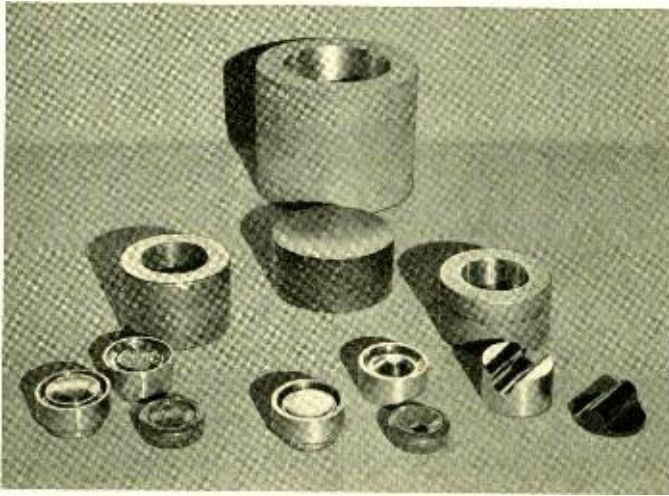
A mold with step-like pistons is used where a large number of test pieces of the type shown are required for experimental purposes
